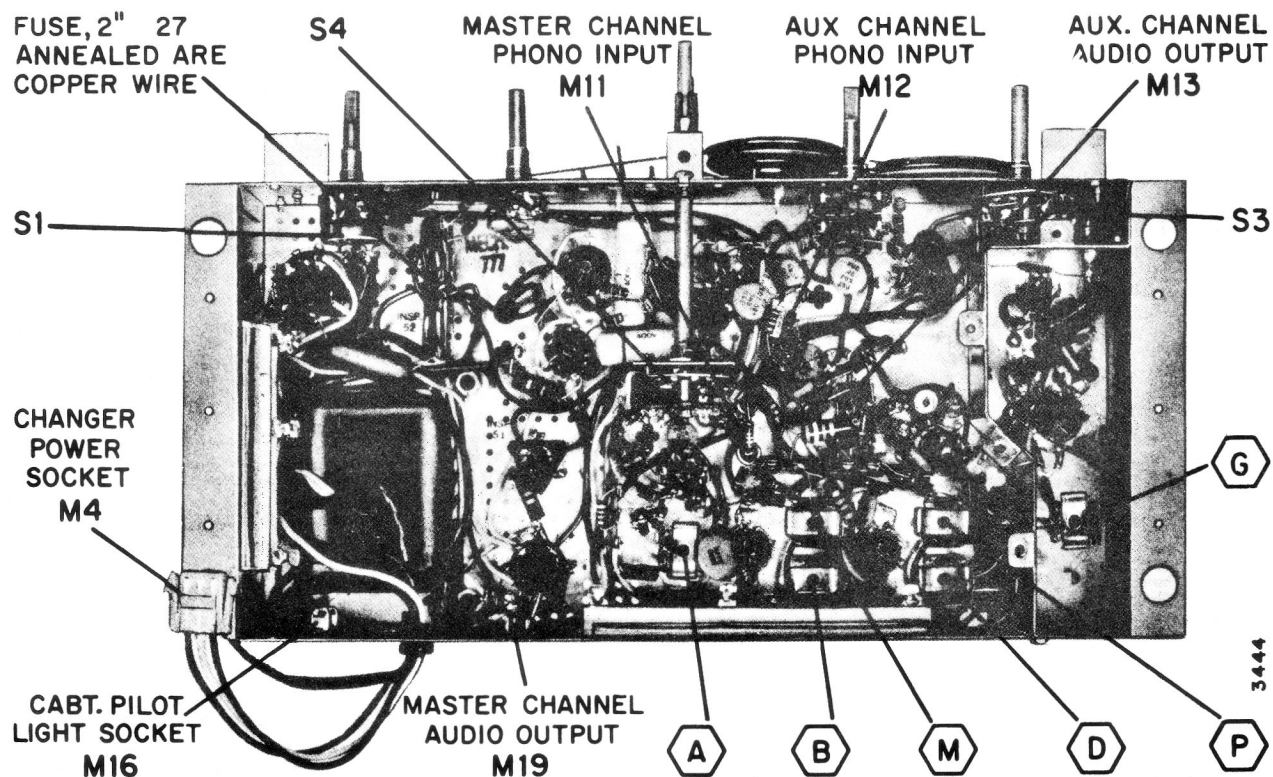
Bottom View of 12B1 Chassis. Input Connections, Output Connections and Alignment Points Shown.
